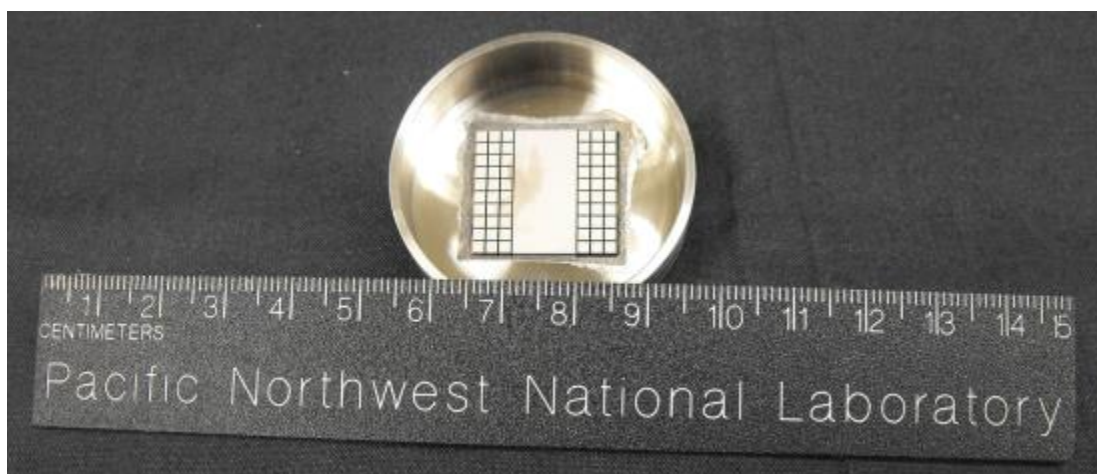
Laser Machined Cup Assembly for the SN3 60-Element Matrix Array PA-UT ETU
